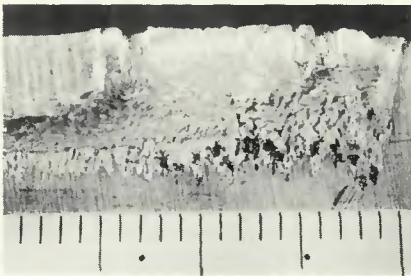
Longitudinal section through weld no. 1 (2024 Al). Rule divisions in millimeters
